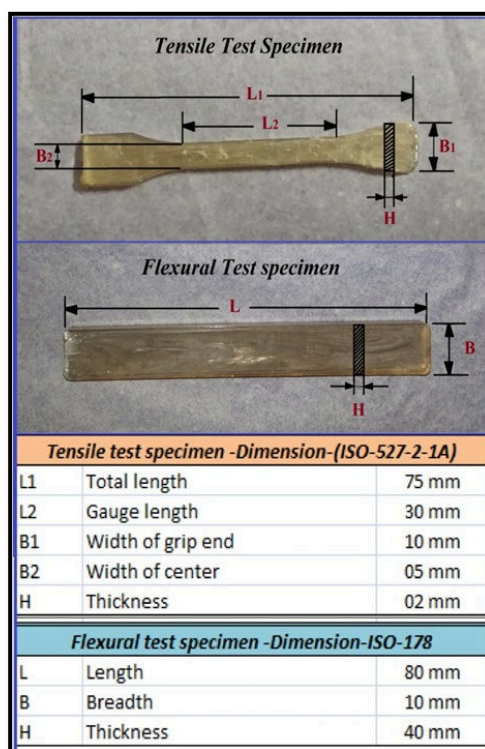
Dimensions of injection moulded specimens for tensile and flexural measurements as per ISO standards.
